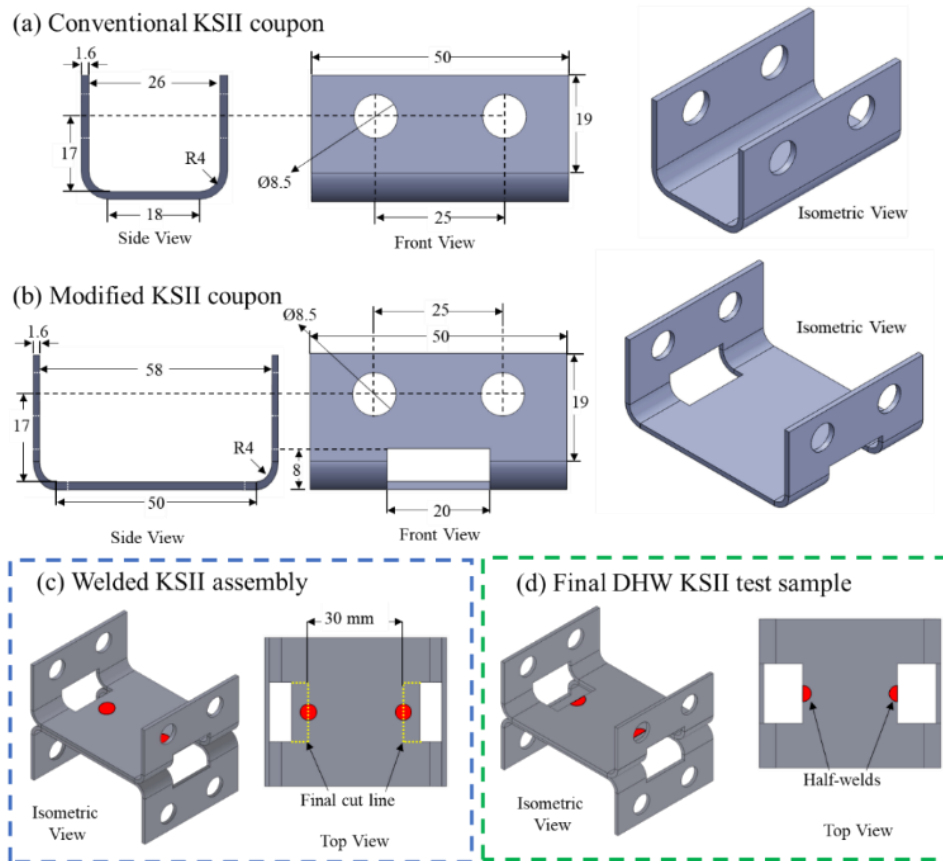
Schematic for KSII (U-shaped) test coupon, (a) conventional KSII coupon (adopted from AWS C1.1 standard [153]), (b) modified KSII pre-weld coupon, (c) welded modified KSII assembly, and (d) Final DHW KSII test sample.
